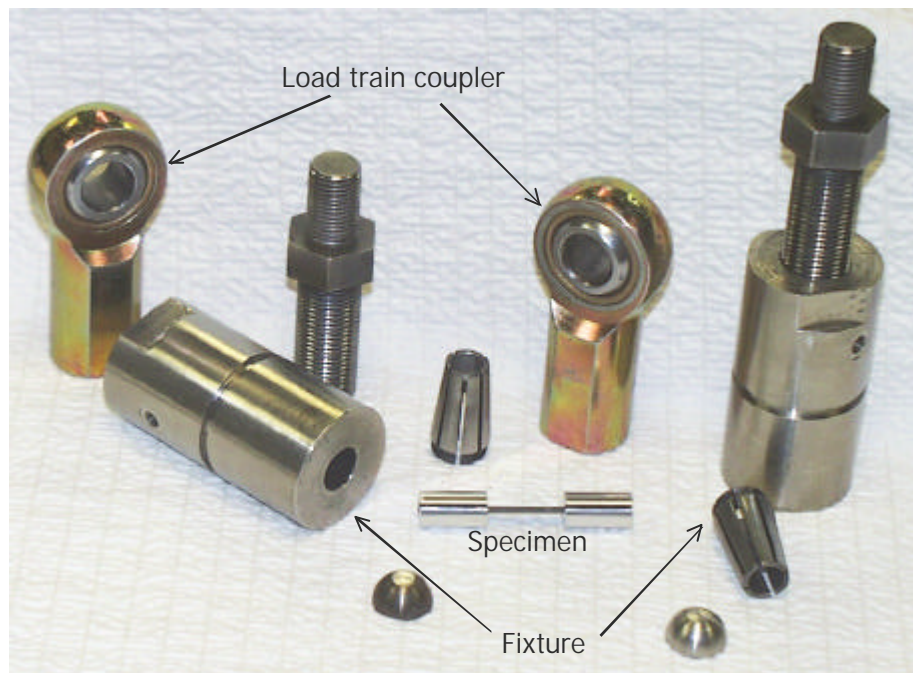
Specimen, fixture and load train coupler for in-plane tensile test
